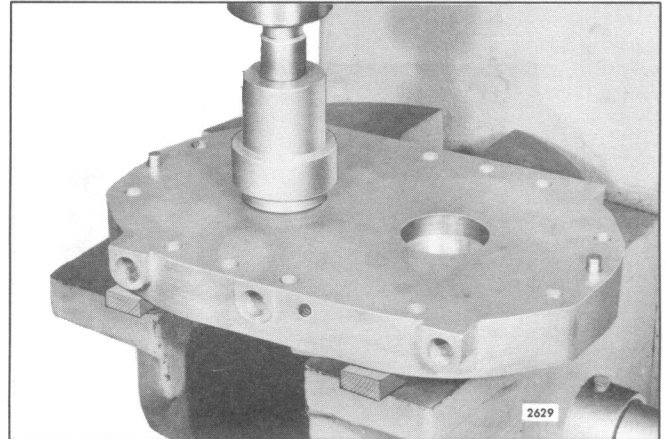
Installing Oil Seal (or Oil Seal Ring Collar) in End Plate using Tool J 6270-3
